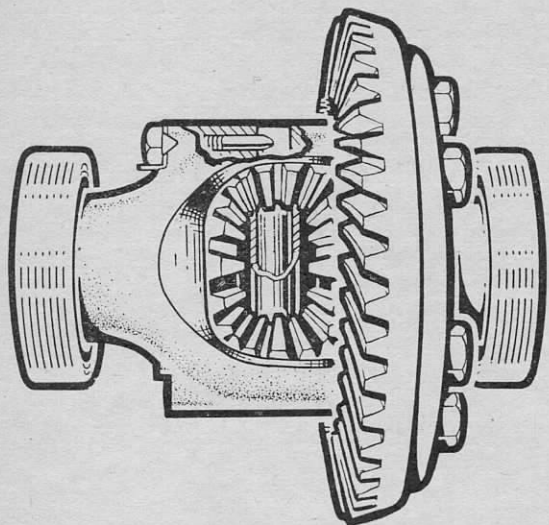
The differential and crown wheel assembly with the ball races in position on the differential cage. The bolt locking the shaft for the differential pinions is clearly seen at the upper left-hand of the cage.
